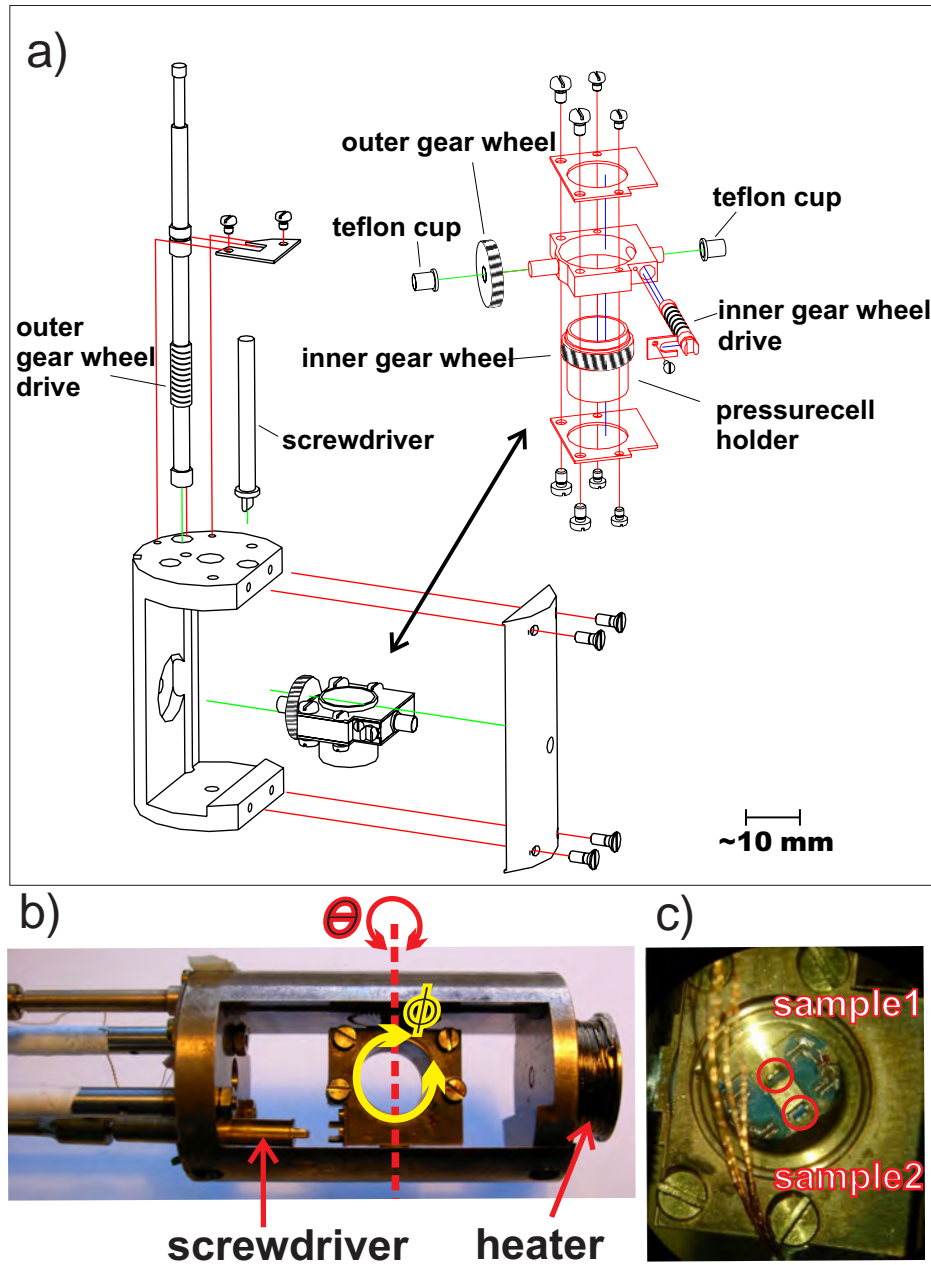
a) Explosion drawing of the two axis rotator for angle-dependent measurements; b) Photo of the two axis rotator with introduced rotation angles; c) Sample holder with two samples mounted with the CuO-layers parallel to the rotator platform
